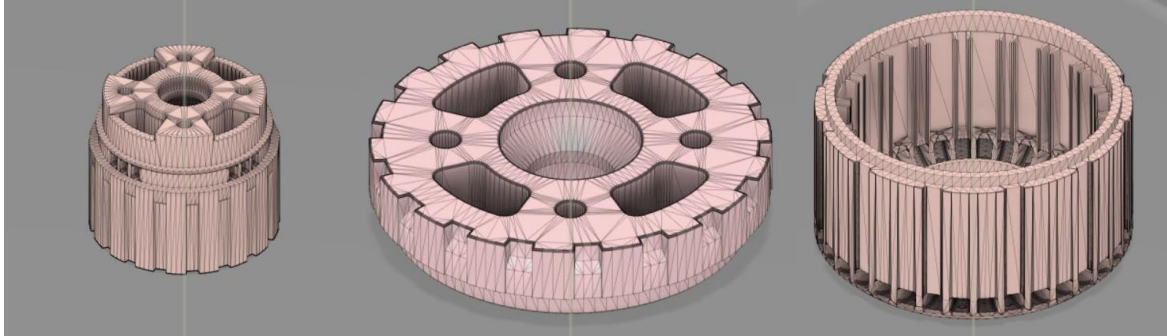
Stator A (left), Stator B (middle), Rotor housing (right)
